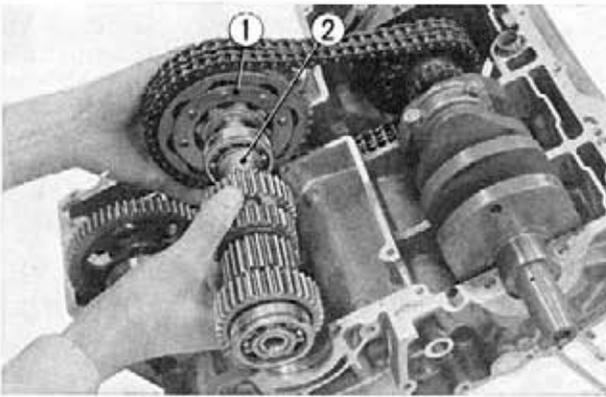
① Primary sprocket ② Transmission mainshaft
